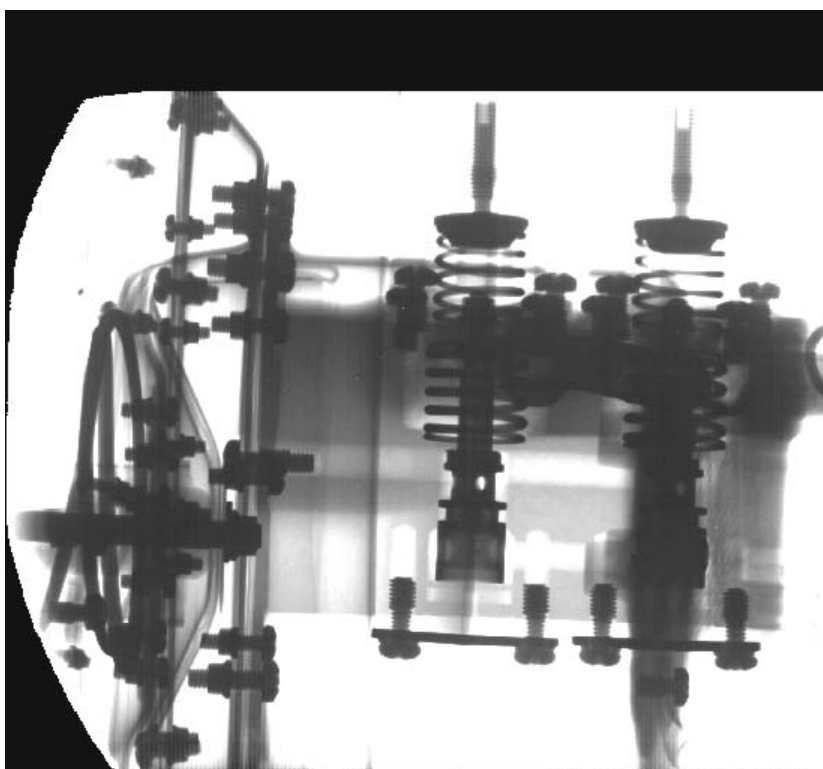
Lower Pressure Relief Valve, control assembly x-ray.
